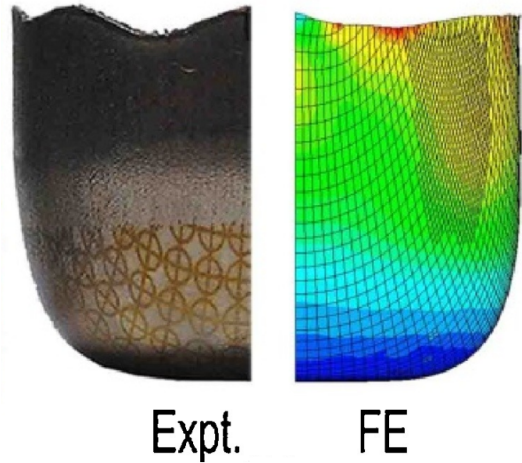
Earring of a rolled metal sheet after deep drawing.
